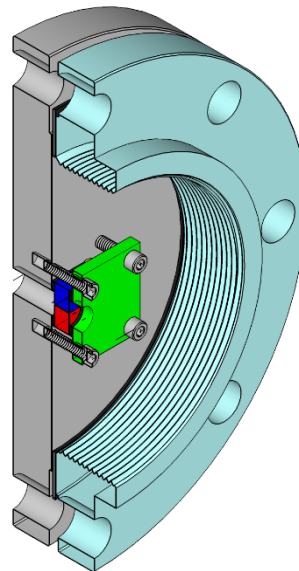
Isometric cutaway showing the microchannel mounted to the flow flange.
